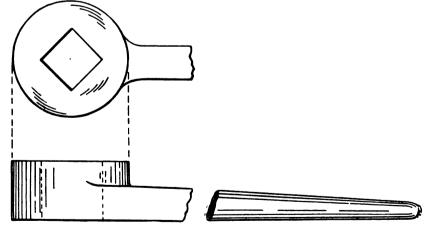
FORGING FOR AN ASH PAN SHAKER.
